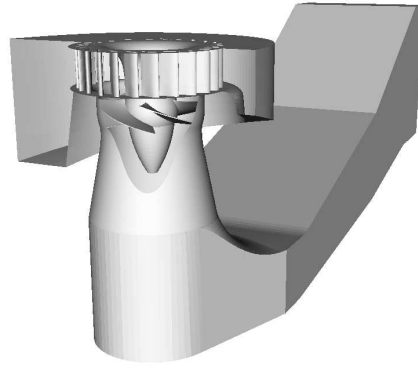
The geometry of Hölleforsen hydraulic system with the spiral casing, turbine runner and draft tube.
